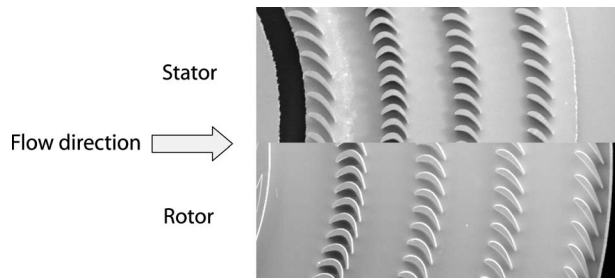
Fabricated stator and rotor blade rows. Upper rows are the stator, and lower ones the rotor. After device assembly, these become interdigitated.
